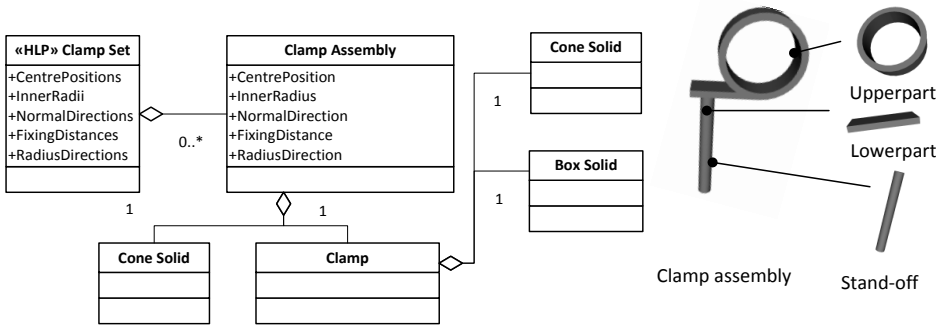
UML diagram of the Clamp Set HLP (left) and exploded view of a clamp assembly (right)
